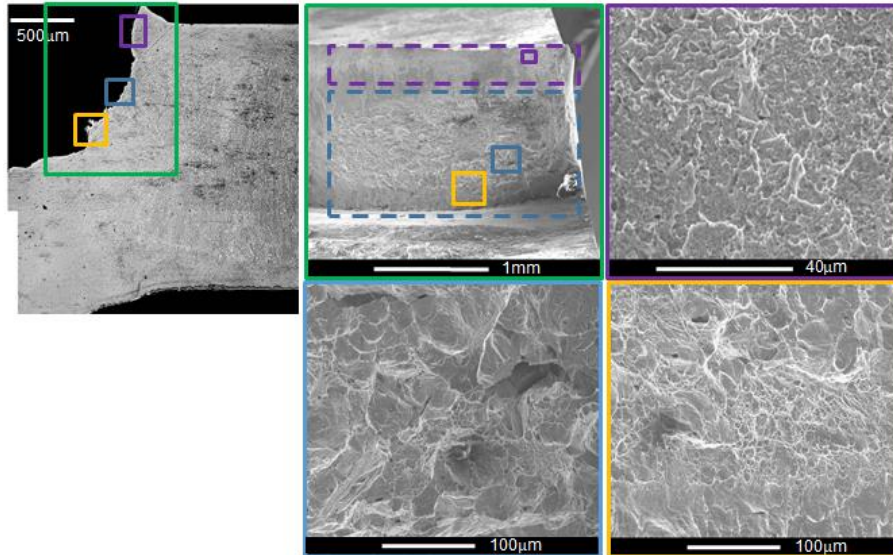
Fracture surfaces of DPCP-H samples showing domination of shear and ductile failure.
